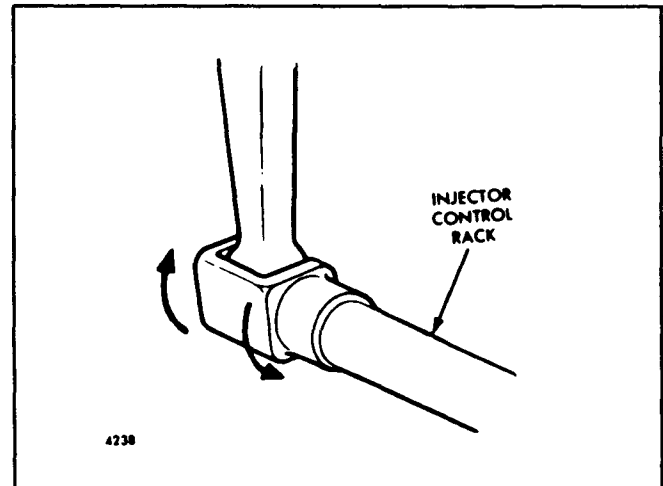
Checking Rotating Movement of Injector Control Rack
